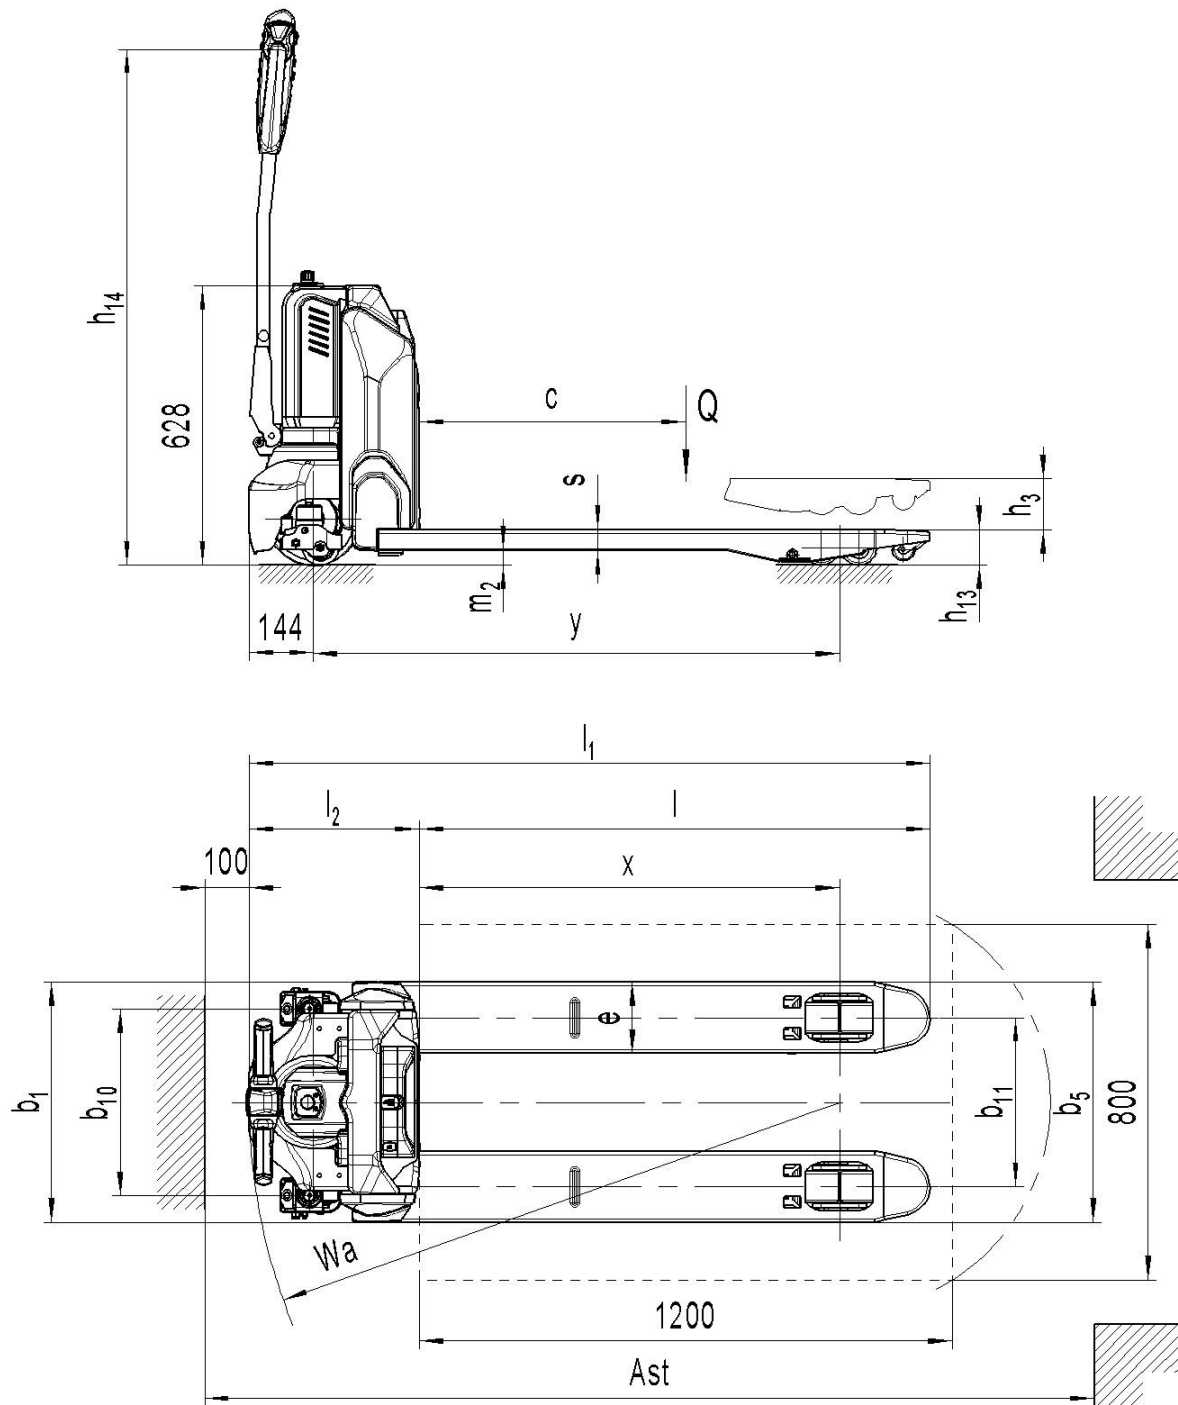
Technical Drawing for EZY-15 / EZY-20
